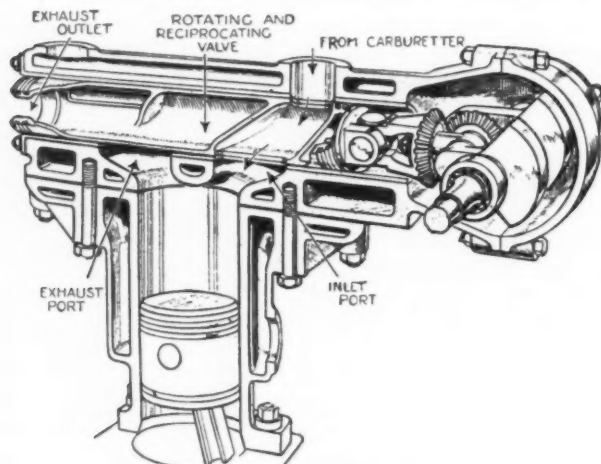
DUPLEX ROTARY ENGINE VALVE
